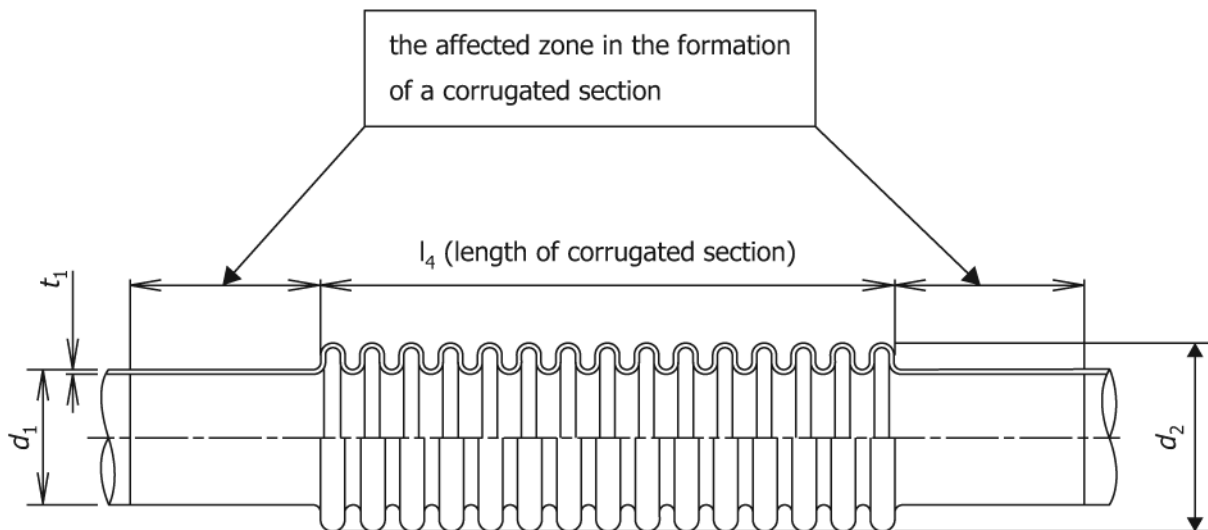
Dimensions of Corrugated Segment (upper portion is a sectional view)
